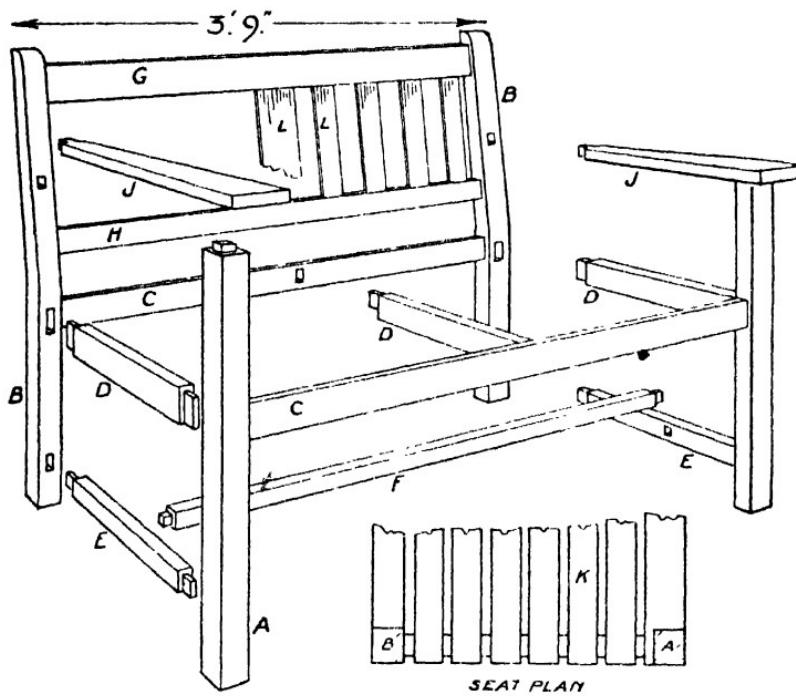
HOW THE SEAT IS ASSEMBLED.
